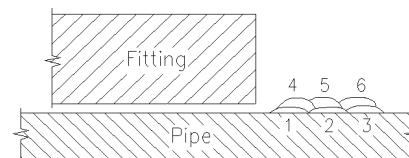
Figure E Weld bead deposition sequence for circumferential fillet welds
